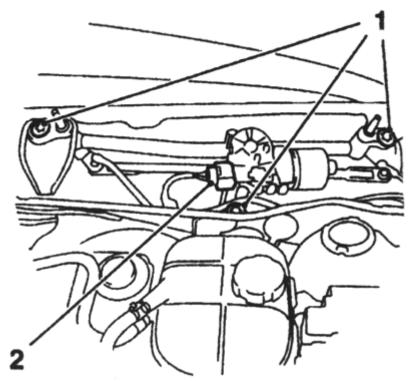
Mounting wiper motor Car Opel Astra (Opel Astra):
